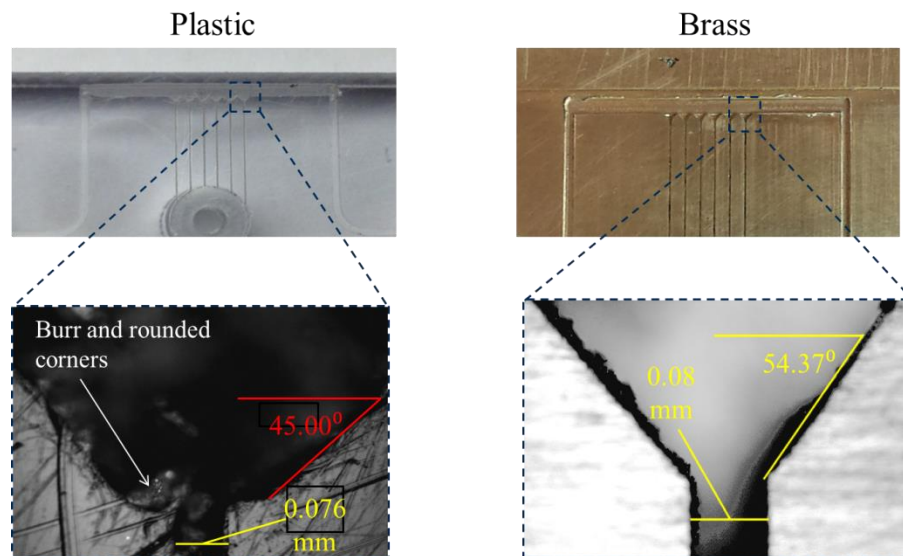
Direct machining plastic resulted in poor surface finish, incorrect dimensions (nozzle angle) and burr. The same geometry was machined in brass with cleaner straighter edges, along with correct dimensions.
